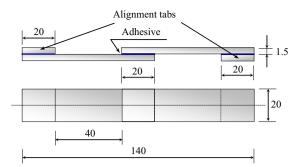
Specimen geometry with 80 µm adhesive thickness (dimensions in mm).
